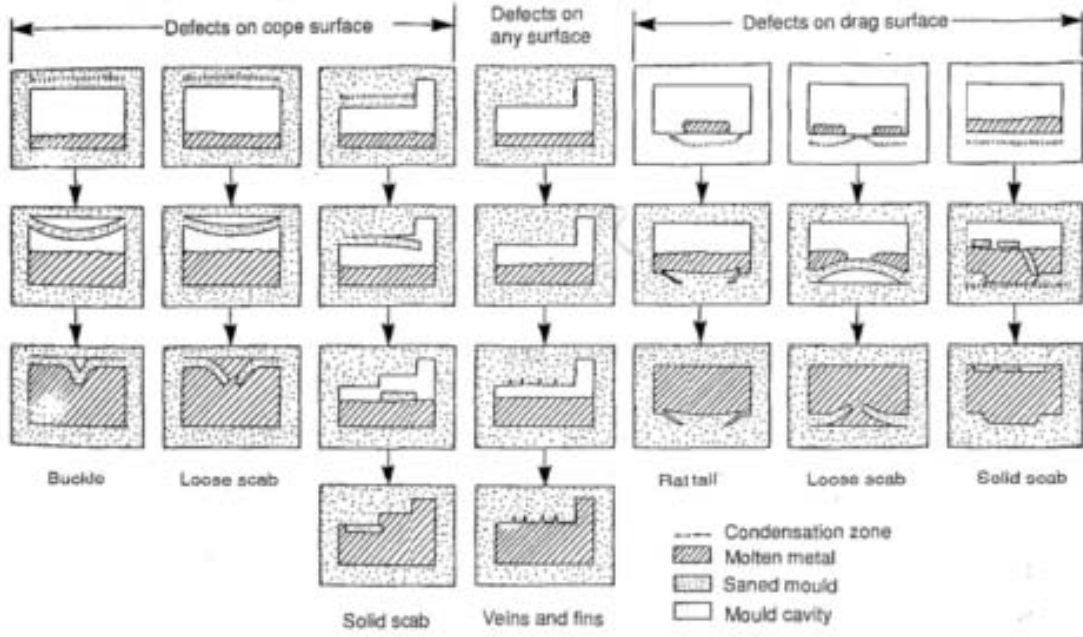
A schematic showing mould surface defects [30].
